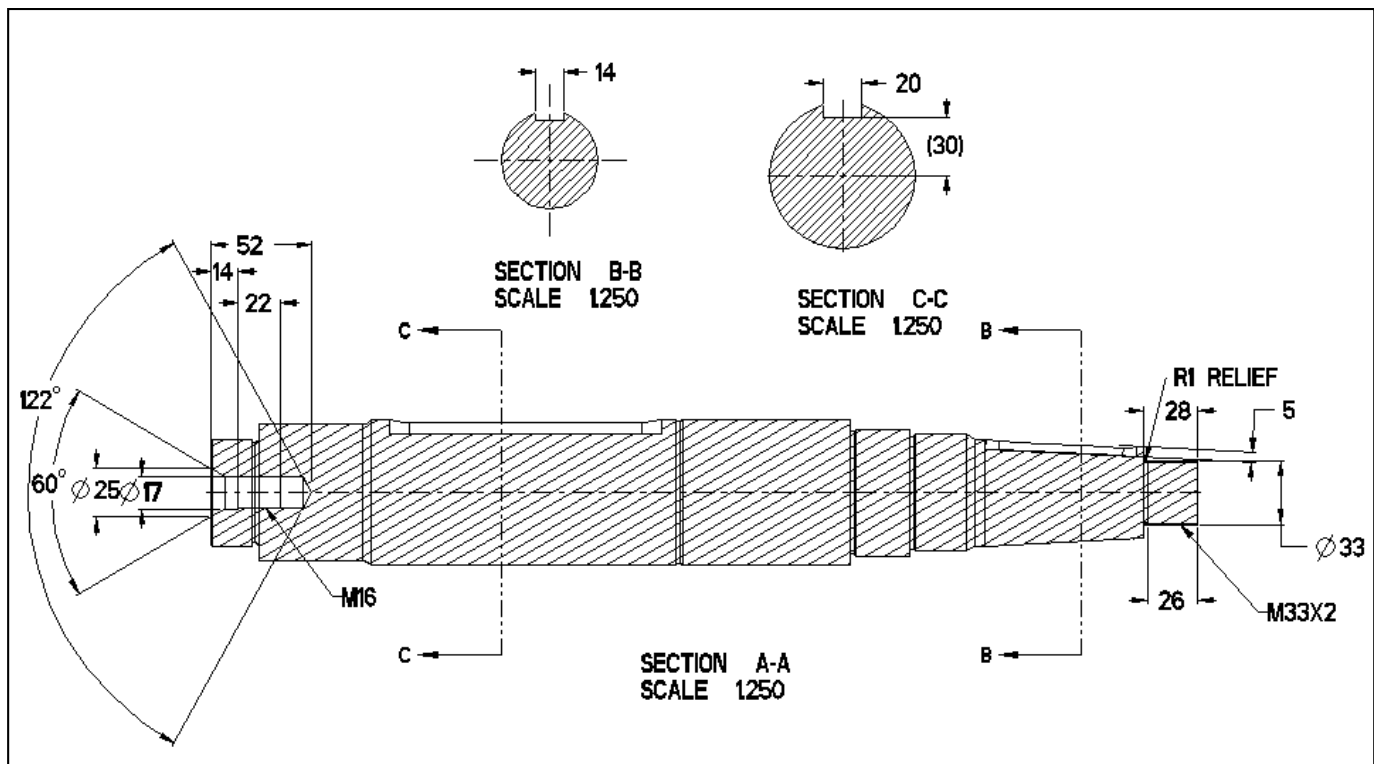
Coupling Shaft Drawing, Sheet Two
